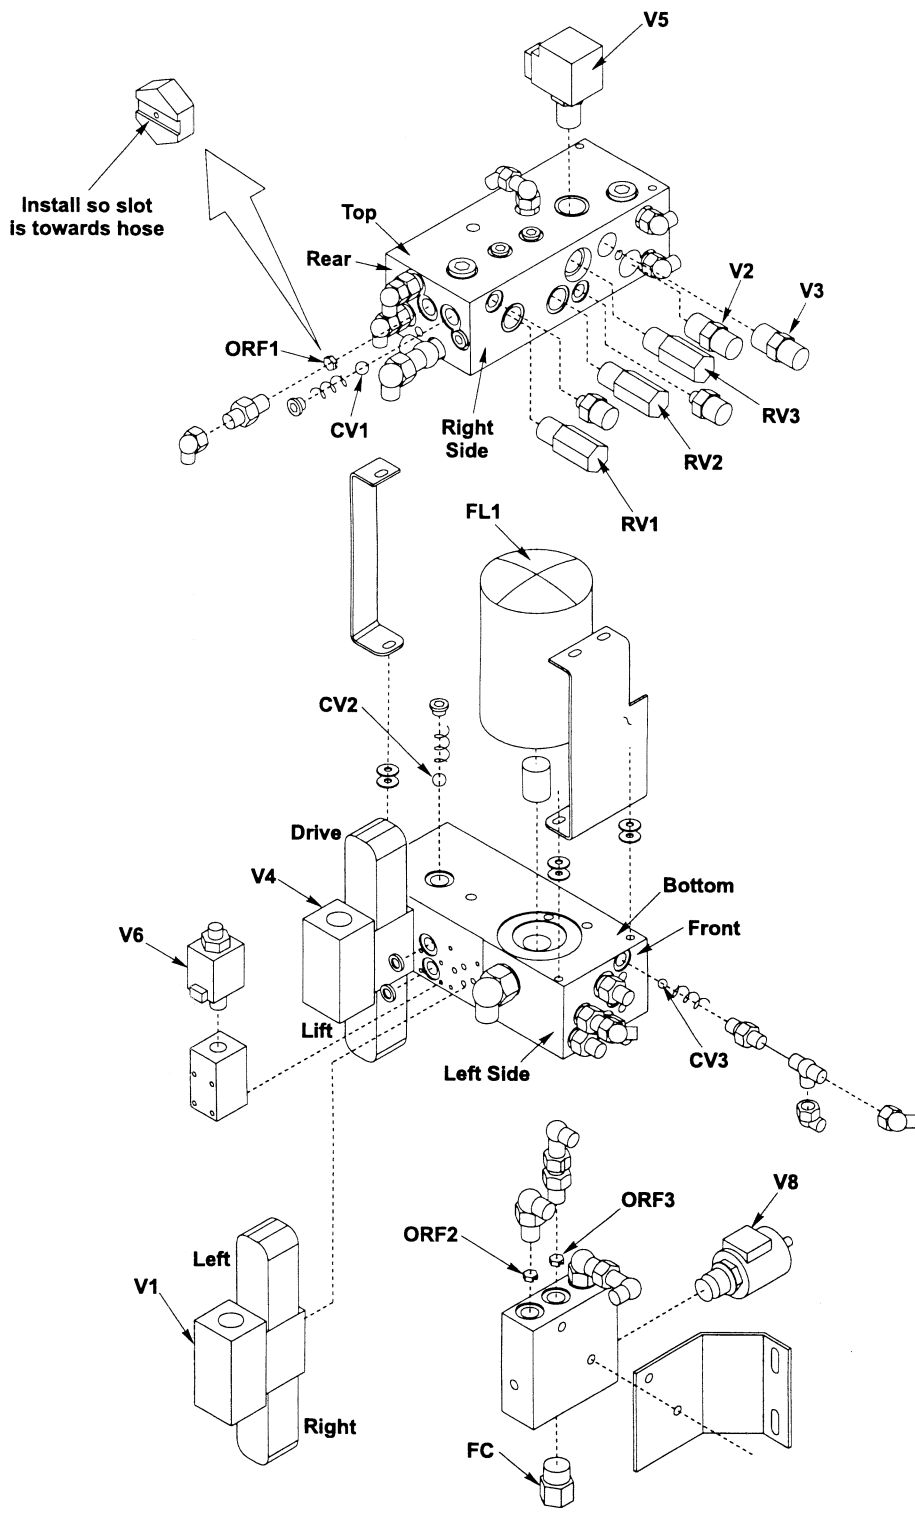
Hydraulic Manifold and Cylinder Valve Assembly
